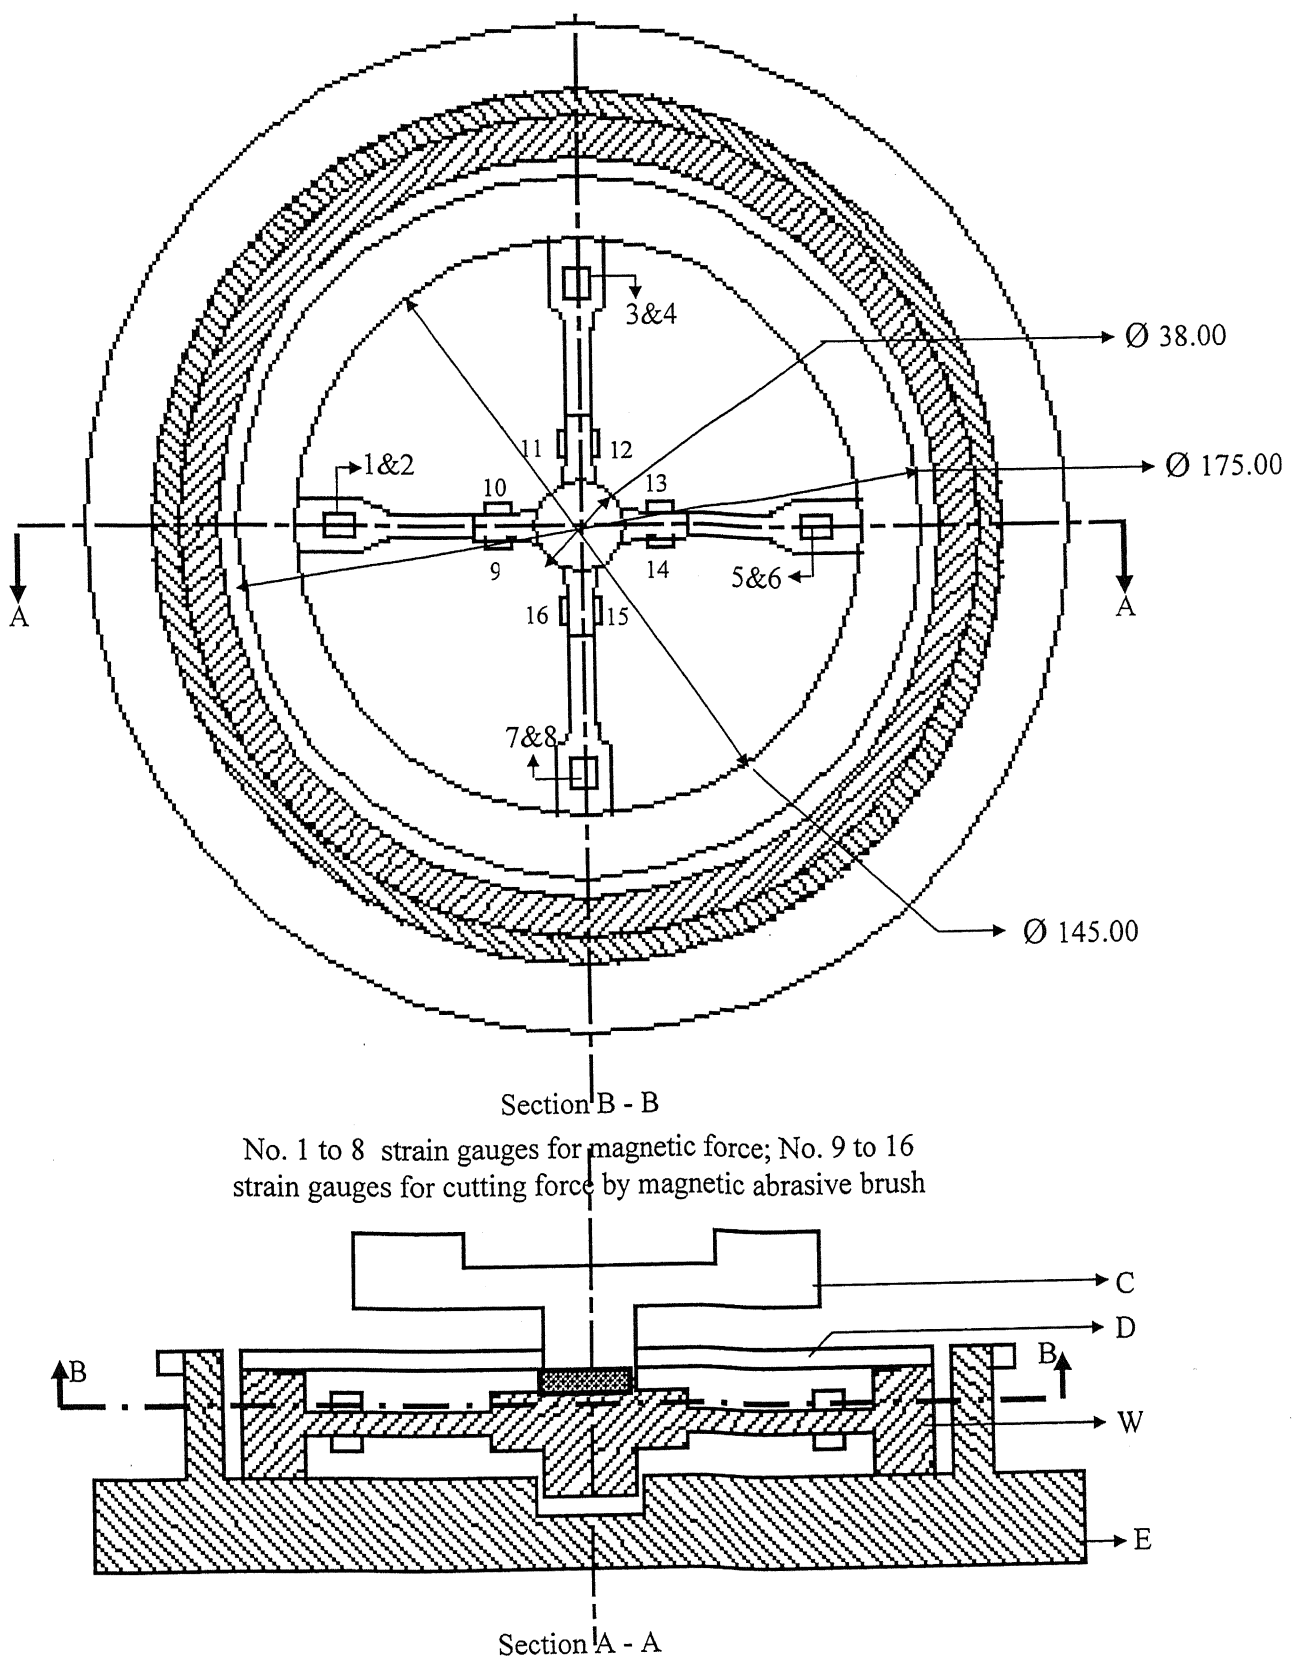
Schematic View of Ring Dynamometer (Resistance type force transducer) C: work-piece fixture; D: cover plate; W: dynamometer wheel (Material: M.S.); E: Base Plate (Al)
